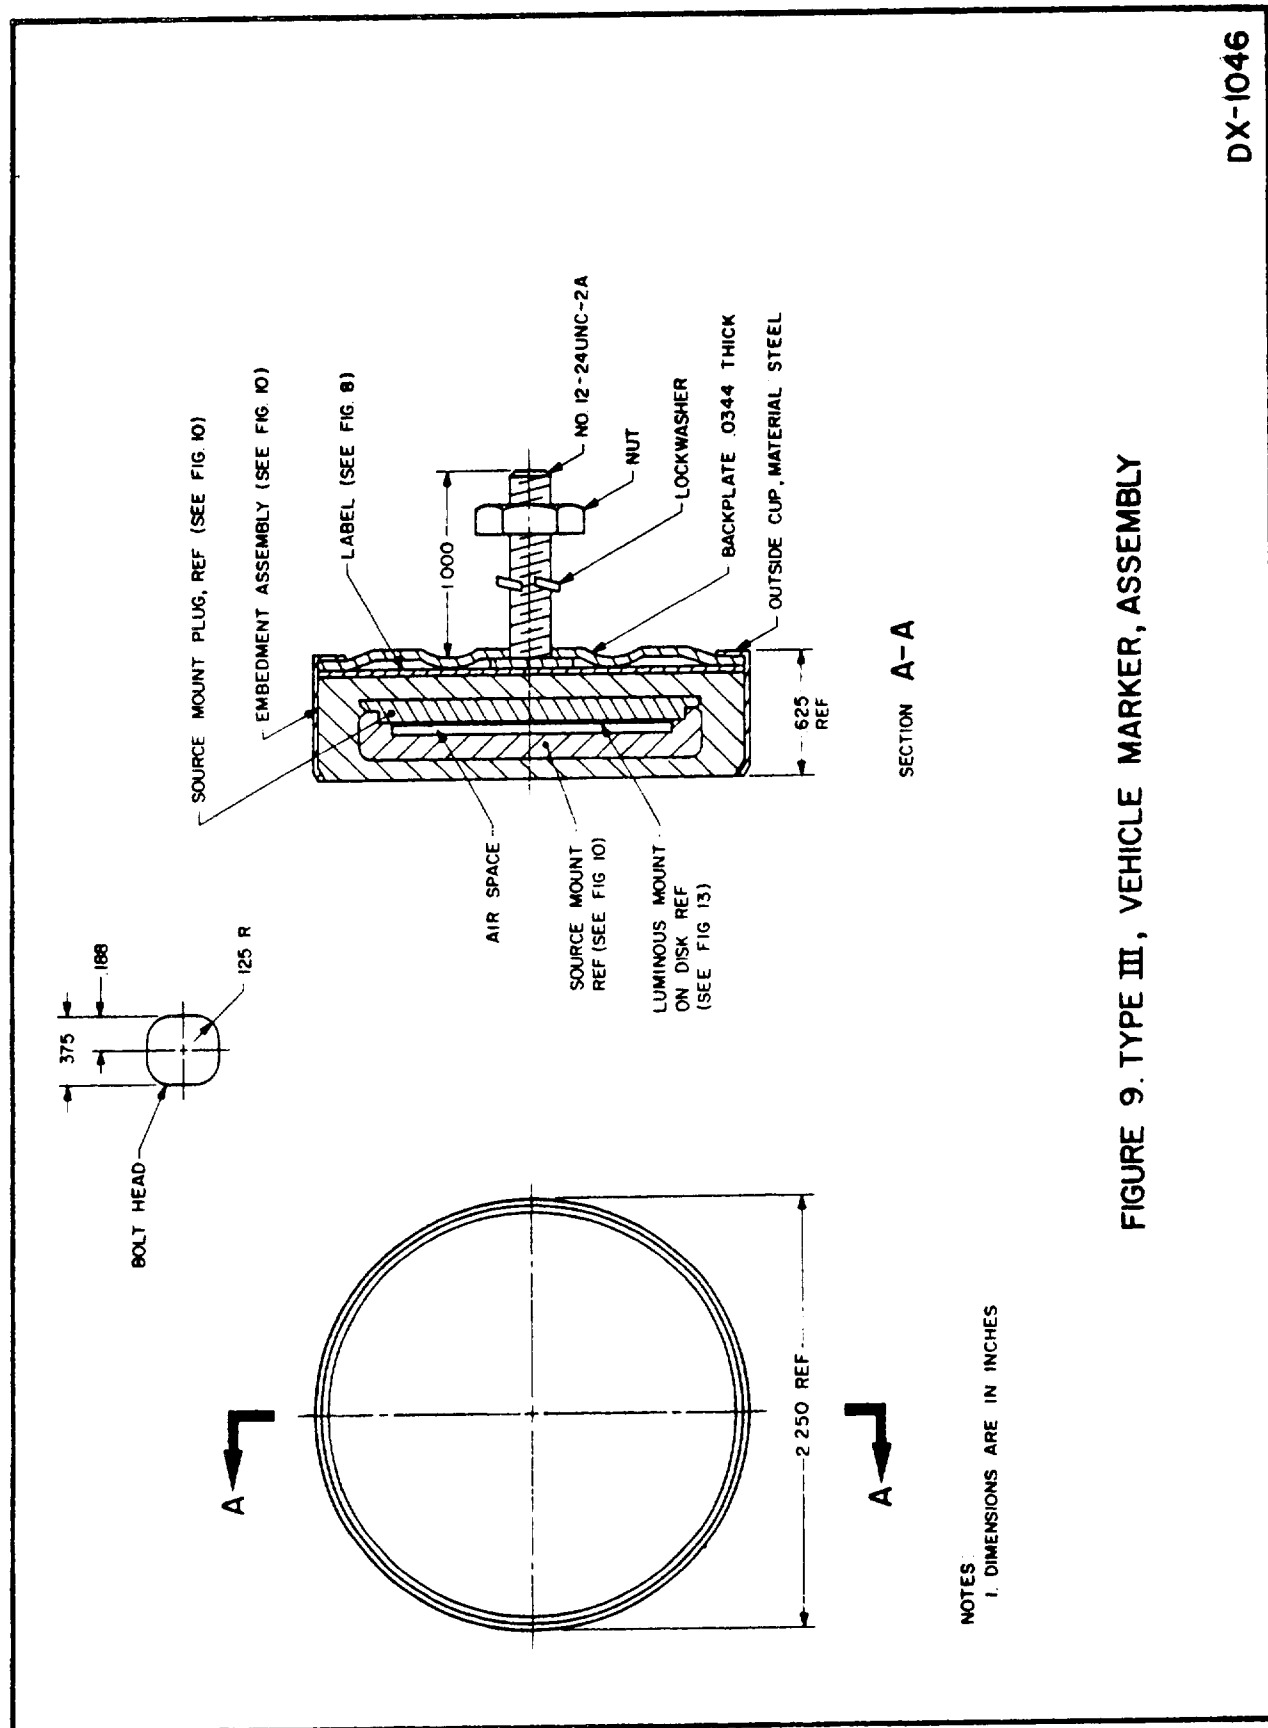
TYPE III, VEHICLE MARKER, ASSEMBLY
